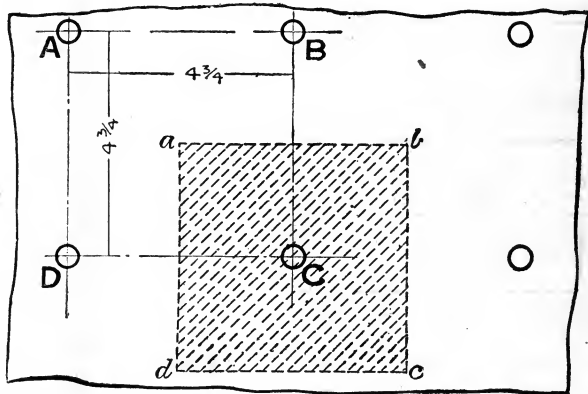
,217.—Portion of cylindrical internal furnace showing spacing of screwed stay bolts.
